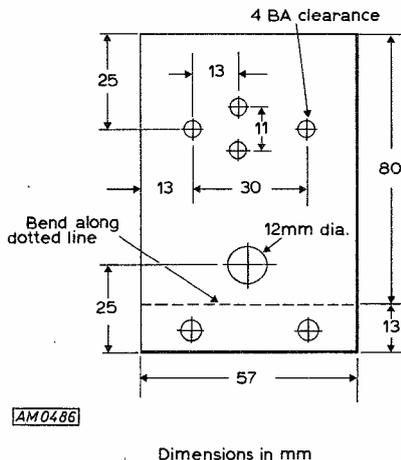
Aluminium bracket for mounting the voltage regulator MVR1 and fuse holder. The fuse was omitted in Fig. 6 and should be connected between mains live and S1.
